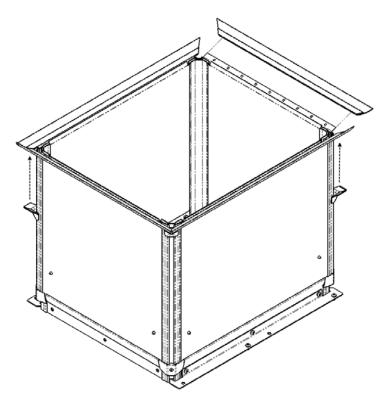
Attaching sealing strips to the vertical exhaust duct
